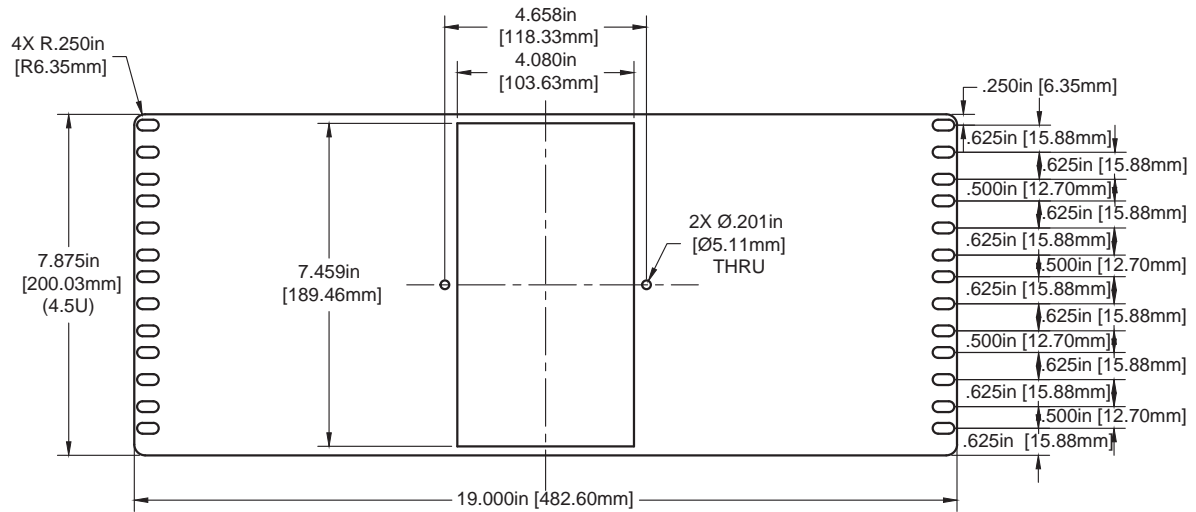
4.5U size panel on which the QRATE Scanner 3300 is mounted; dimensions in inches (mm)
